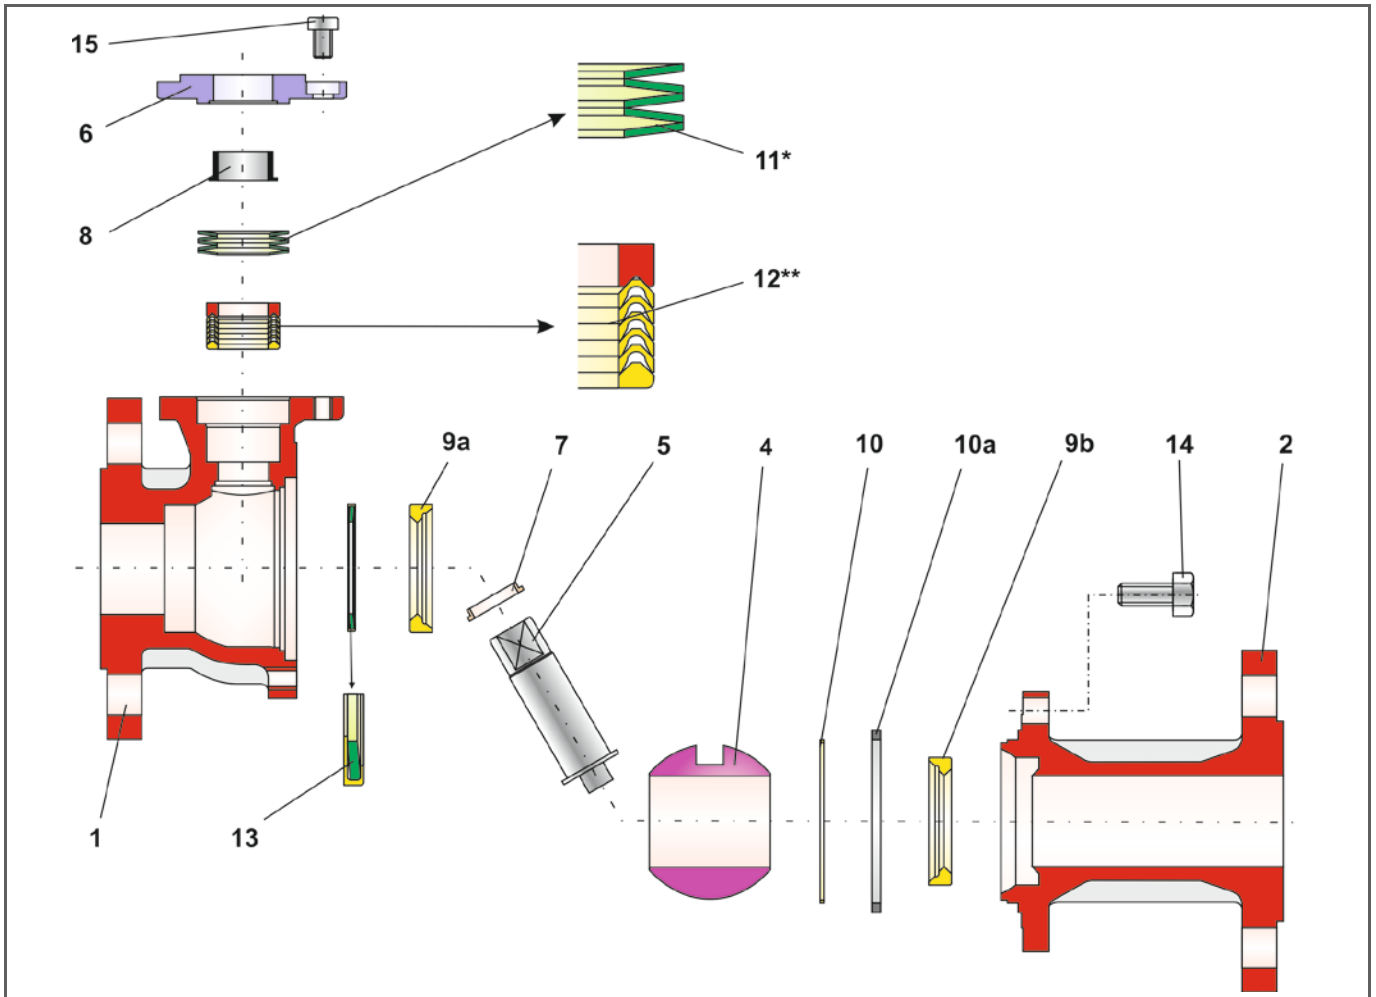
Exploded view of BR 26d Ball valve, Standard-Version
